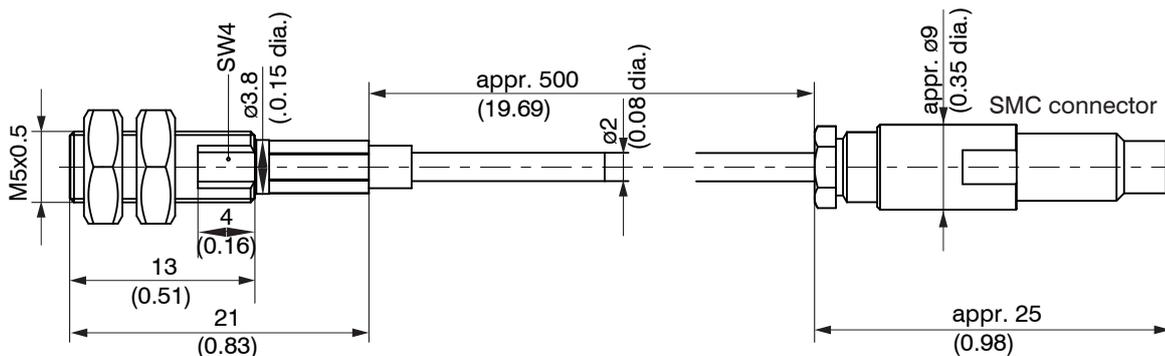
Dimensions EPS08 without cable extension, dimensions in mm (inches), not to scale
